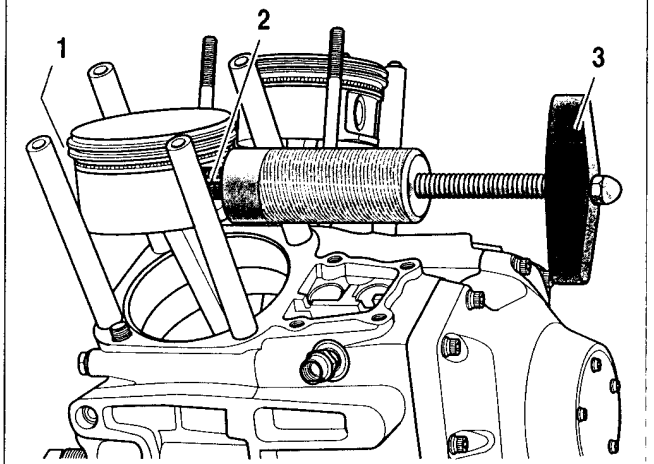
Piston Pin Remover (Part No. HD-42320-A)
